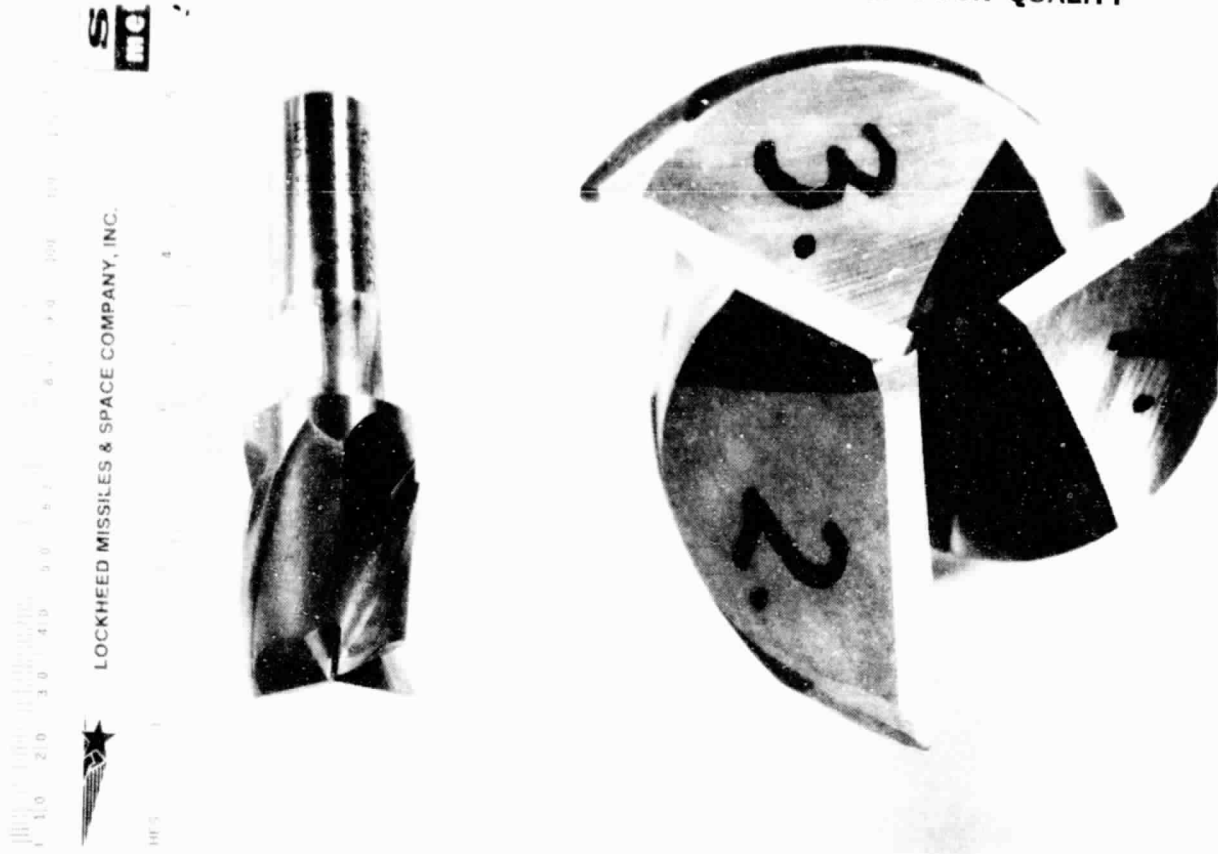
1.25-in. diameter roughing cutter used to machine entire 8-ft long panel.
